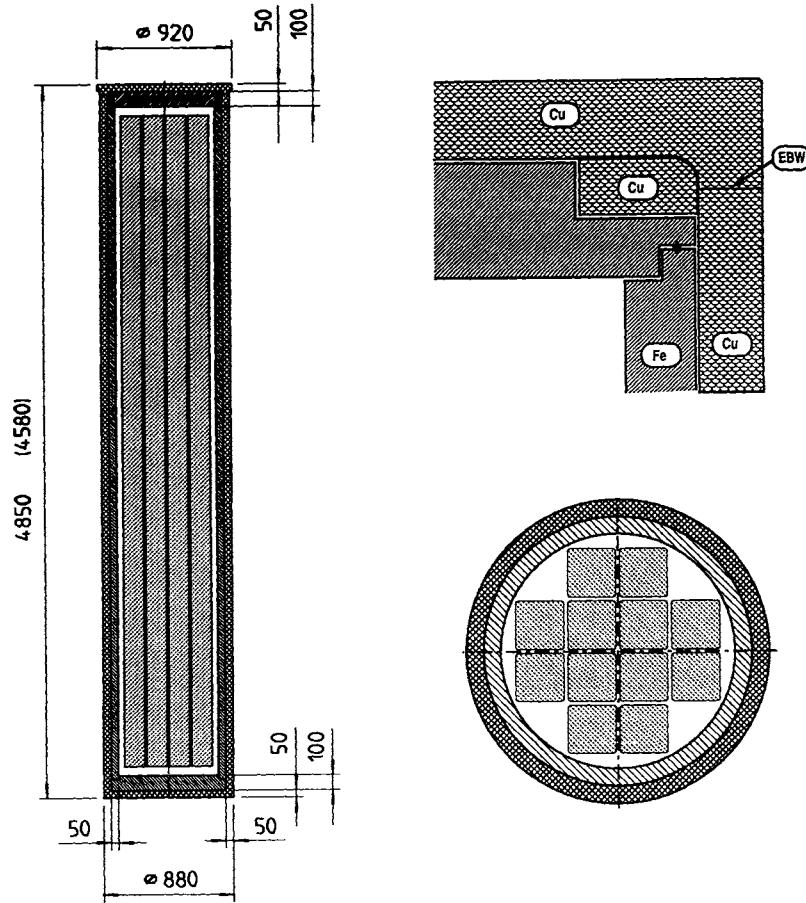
Geometry of canister. Upper right part shows blow-up of region with final circumferential weld. Dimensions in mm. From Josefson et al. (1993)
